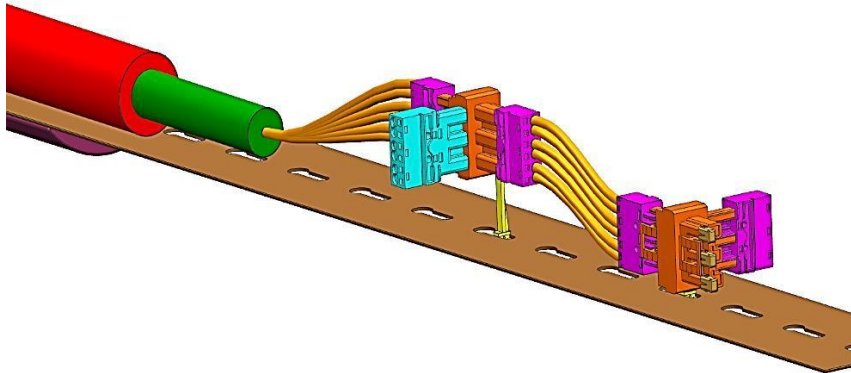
Third and fourth Wago-mini carrier assembly detailed view
